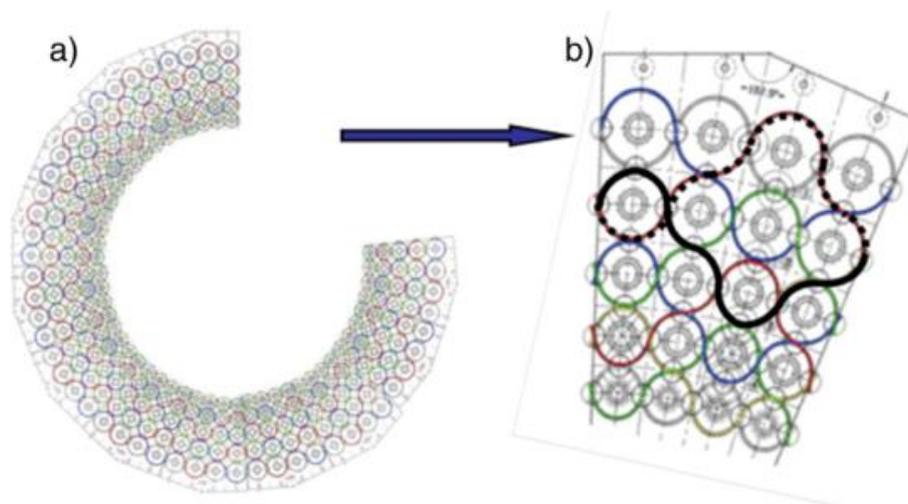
(a) Outline of the carriers on a 3D braiding machine; (b) detailed view of the motion of a horn-gear during a 3D braiding operation <sup>[56]</sup>.
